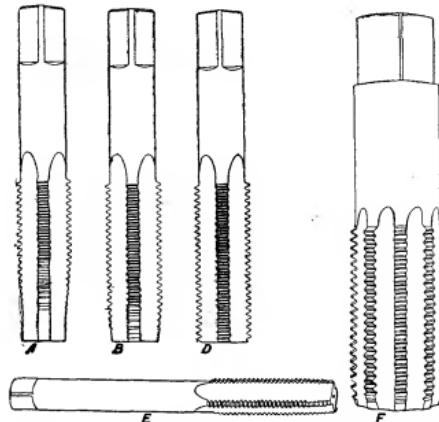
Taps. A, Entering or taper tap; B, middle or second tap; C, bottoming or plug tap; D, machine tap; E, hob or master tap.
